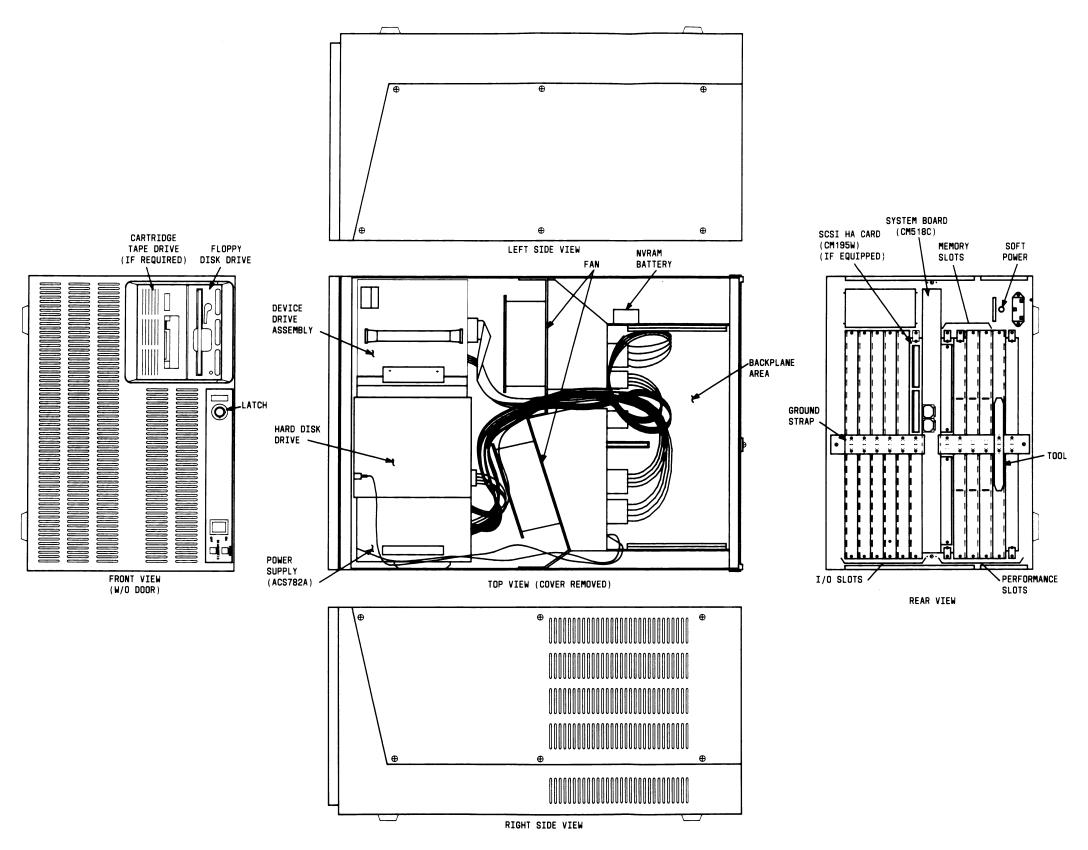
3B2/1000 Computer Cabinet Assembly Drawing (ED-3T056-30)
